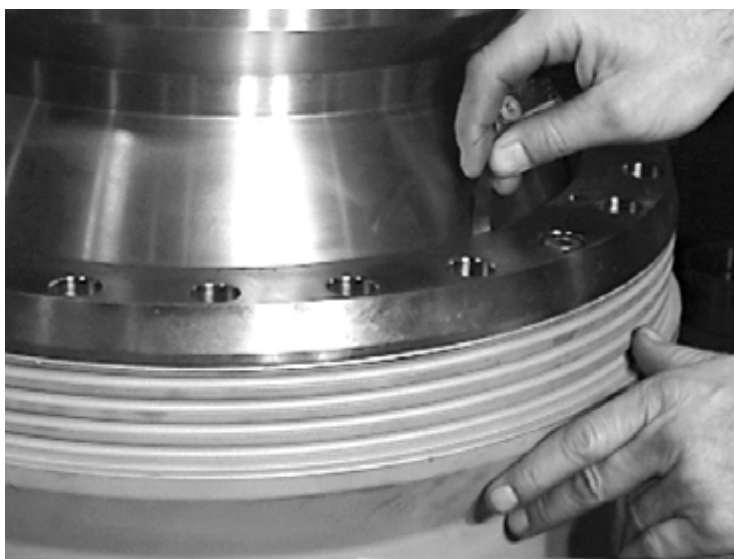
Use Feeler Gauge and Obtain Zero Clearance Between Ball and Retainer
